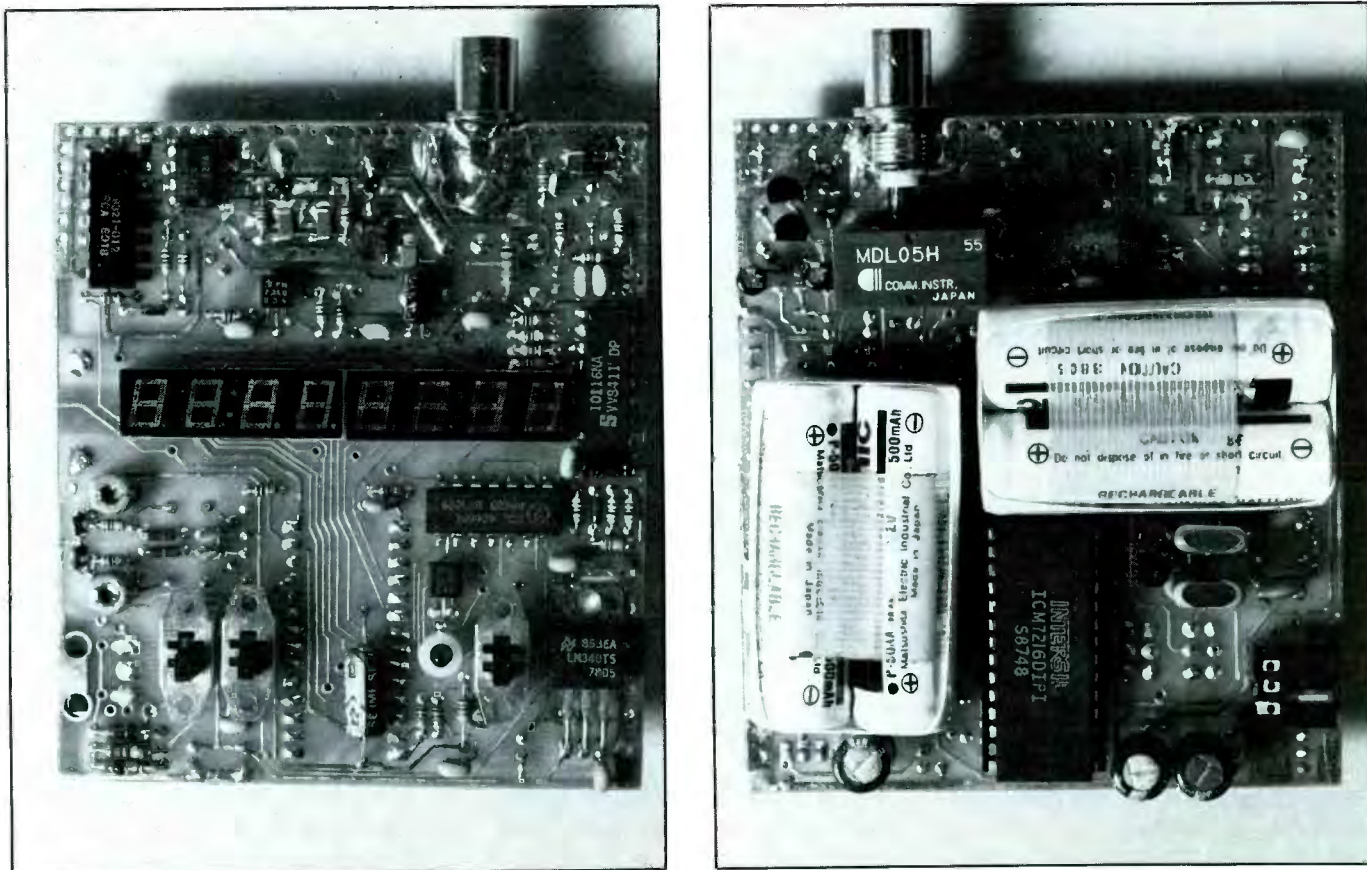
These photos show fully wired circuit-board assembly from top (left) and bottom (right) perspectives. Note in both photos how BNC connector mounts on board with its threaded section straddling both sides.
